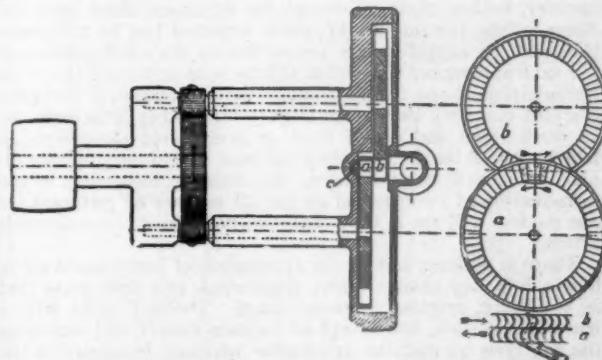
DETAILS OF THE SEGER TURBINE.
